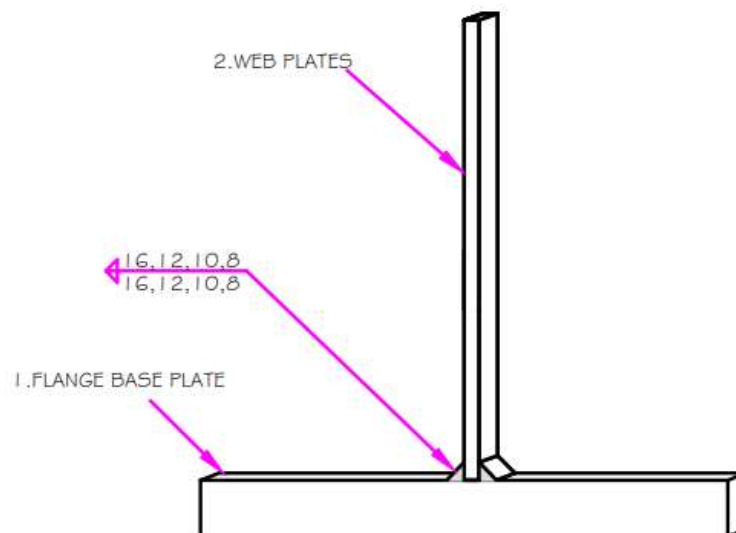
Drawing of test samples without gaps (dimensions in mm)
